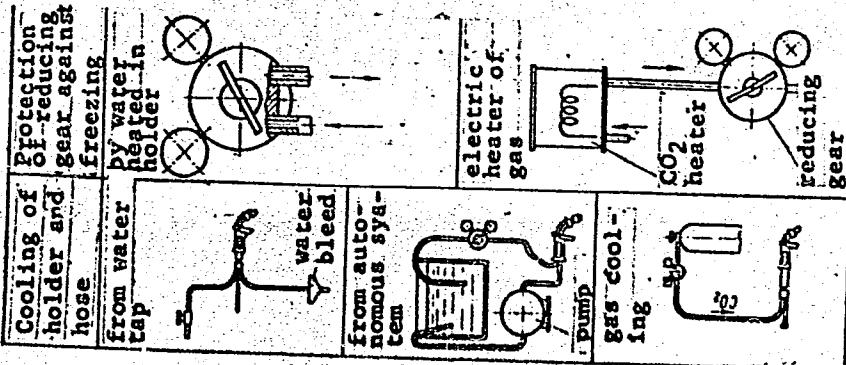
, b. Variants of accessories for TsNIITMASH-designed standardized semiautomatic welding machines
